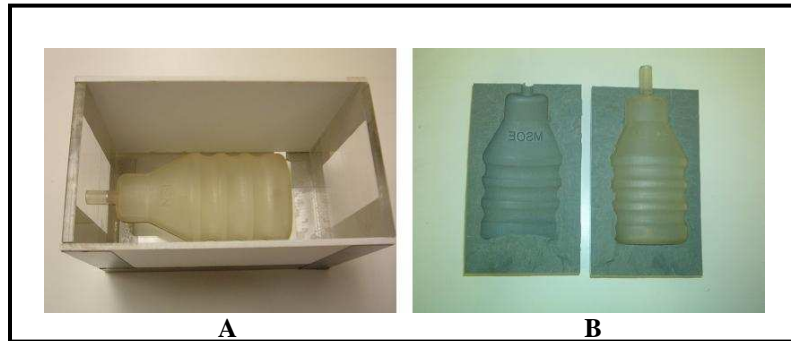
A) SLA Pattern in Box B) Pattern in Rubber Silicone Mold
